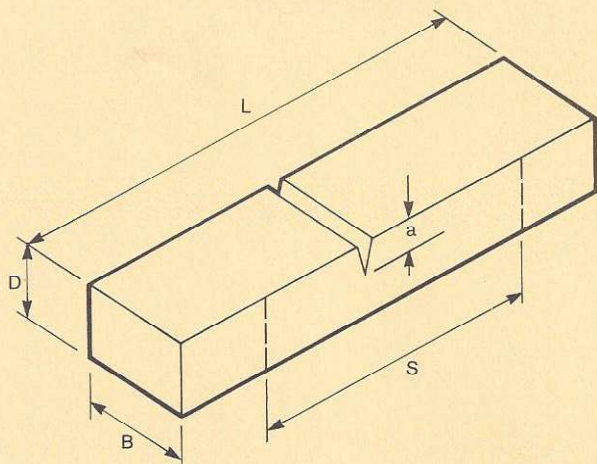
Dimensions of impact specimens relative to pipe geometry
